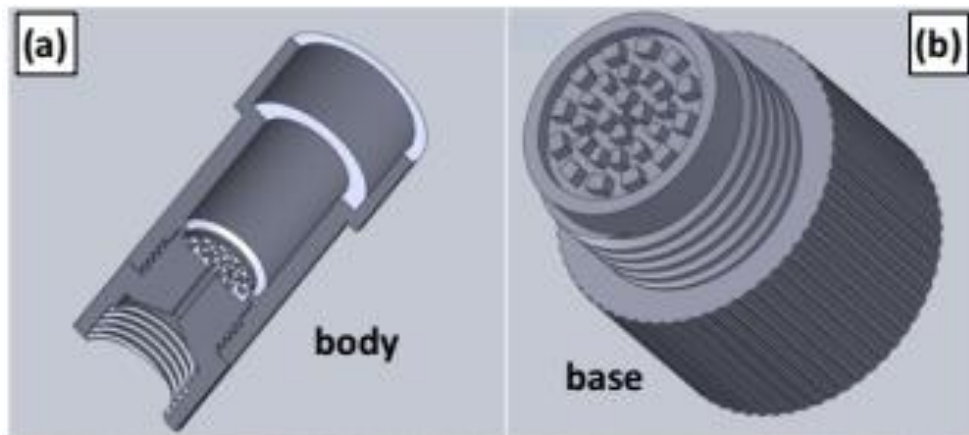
CAD drawing of custom centrifuge insert (a) body of insert (b) base of insert.
